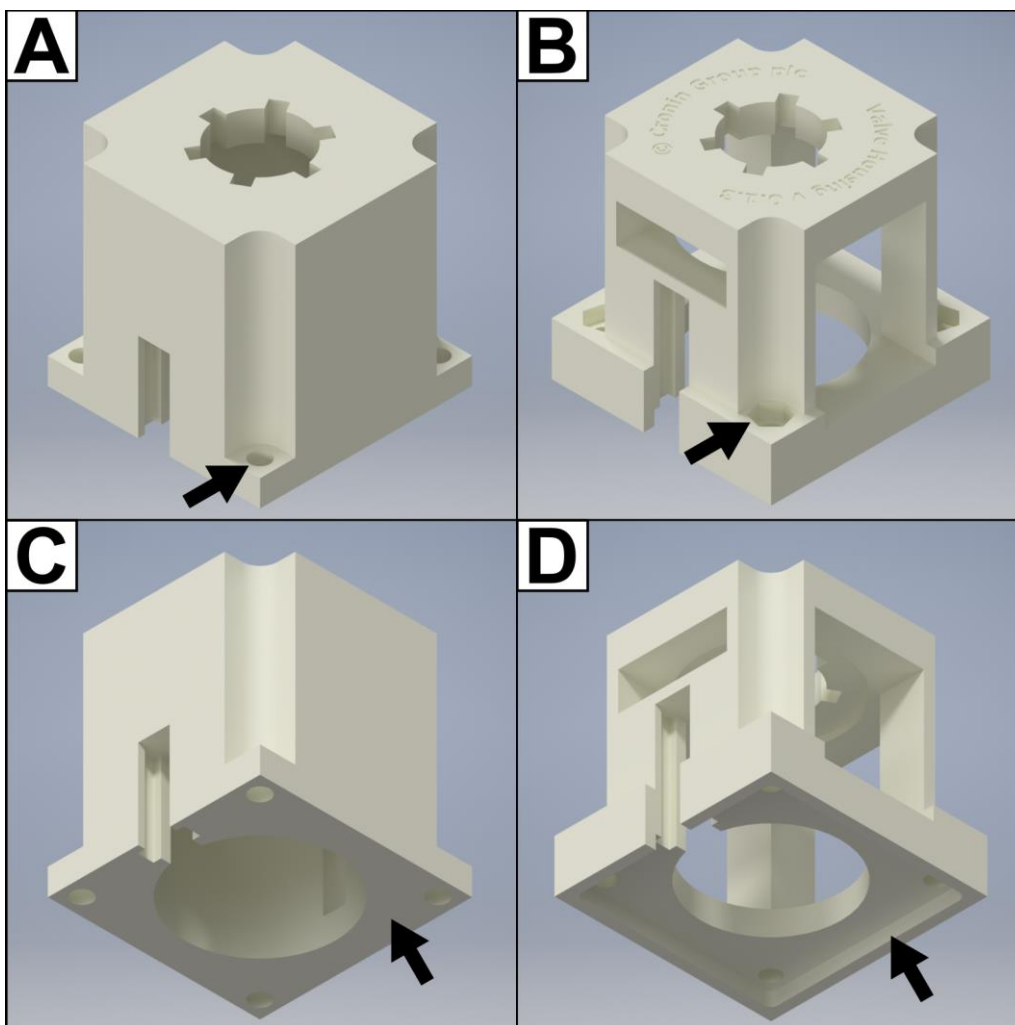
Valve housing. A) initial design, showing the plain mounting holes (arrow). B) improved design, showing the hexagonal nut traps (arrow) as well as the embossed version. C) initial design, showing the plain underside (arrow). D) improved design showing the raised skirt (arrow) for locating the motor. The large openings in the new design allow easy access to the motor connector for monitoring and trouble shooting.
